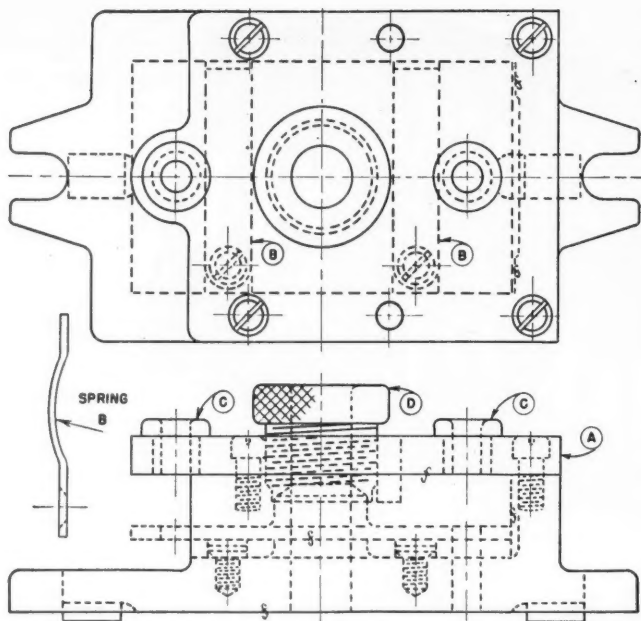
Drawing of a Jig Which Can Be Used in Machining Uneven or Distorted Steel Stampings
